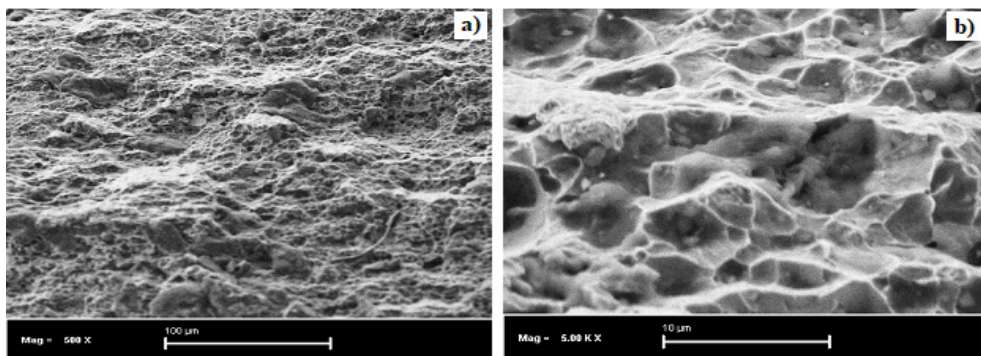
Fracture surface image of TRIP800 steel tested at $25\text{ }^\circ\text{C}$ a) lower magnification b) higher magnification
